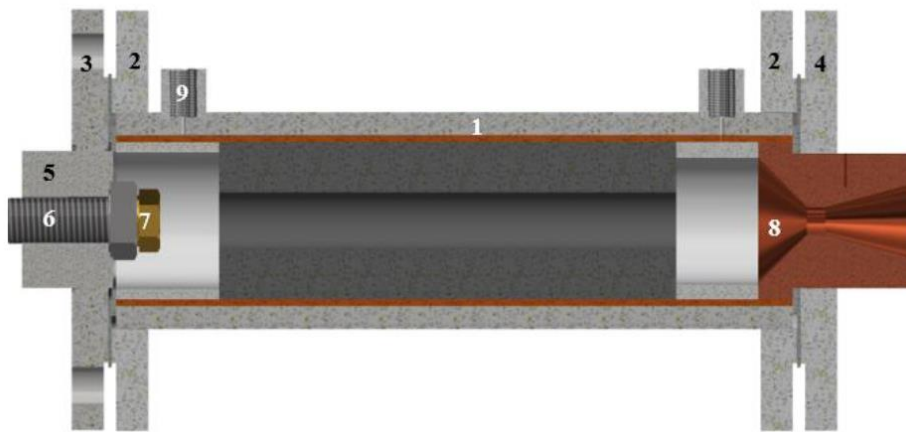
Combustion chamber cross-section with inserted fuel grain cartridge (Maharaj, 2018)
